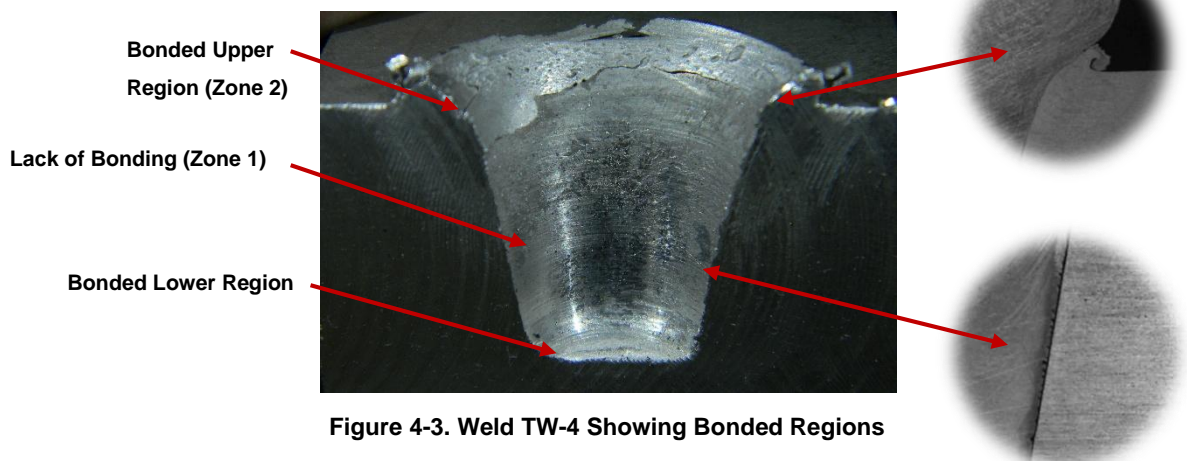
Weld TW-4 Showing Bonded Regions
